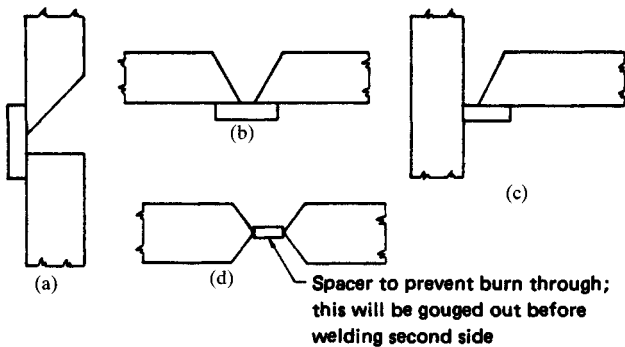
The backup strips shown in (a), (b), and (c) are used when all welding is done from one side or when the root opening is excessive; a spacer to prevent burnthrough as shown in (d) will be gouged out before welding the second side. (*The Lincoln Electric Company.*)
